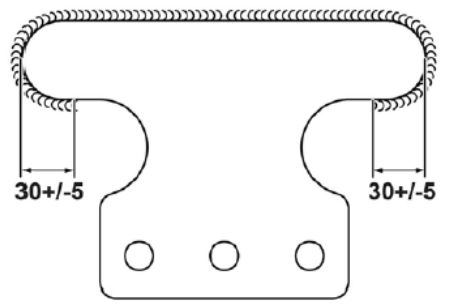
Mercedes Attachment Bracket with Welding Guidelines
